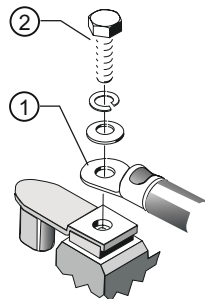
Connection with cable lug and fixing screw (schematic diagram)
